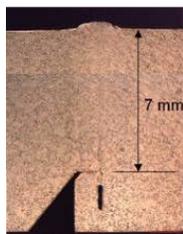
Cross-section of a junction ring to disc EB weld.
